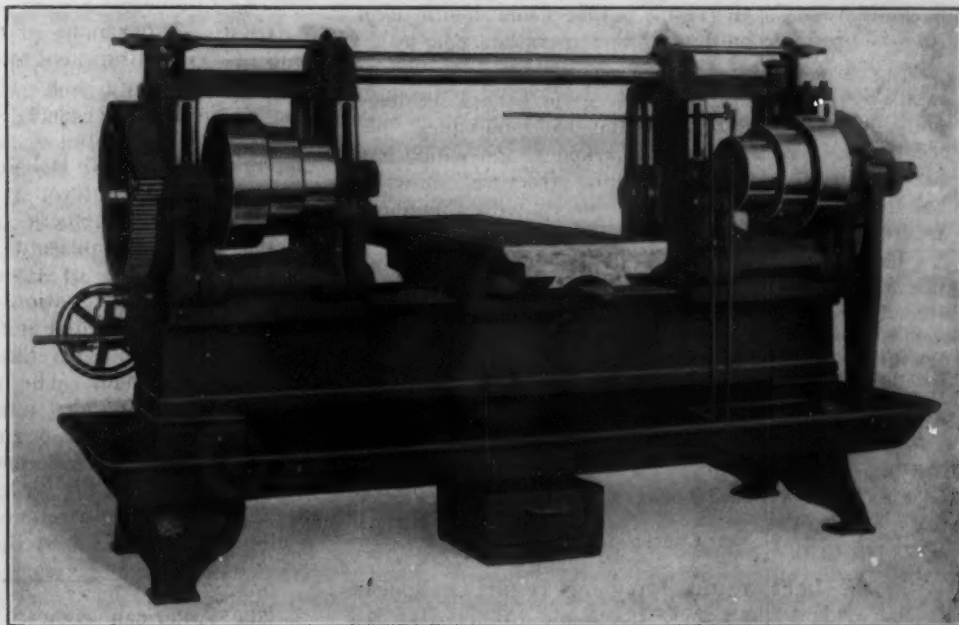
A Rear View of the Double-Head Lincoln Milling Machine.
